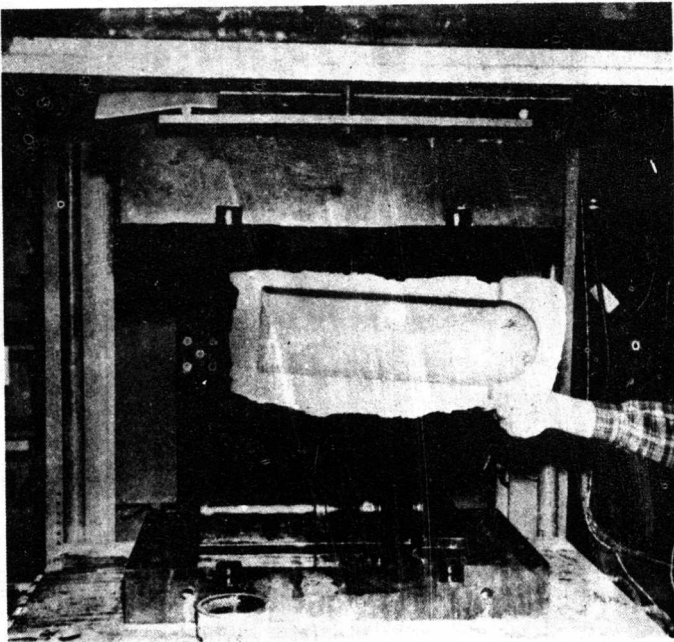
A molded part being removed from cast tool-die setup. (*Magnolia Plastics.*)
